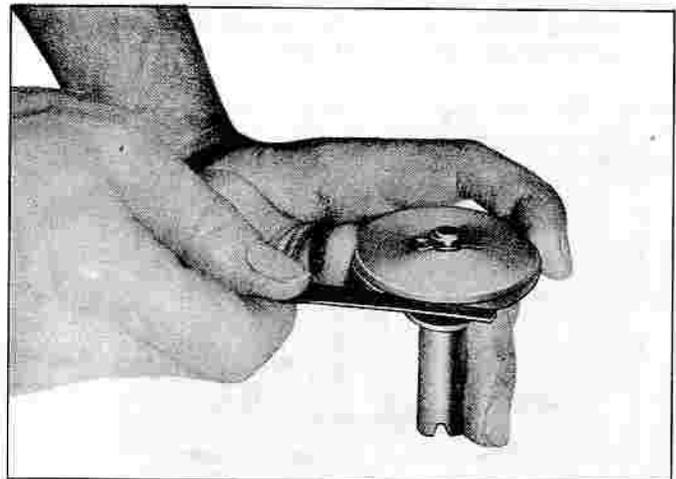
E-13—Measuring Piston-to-Ring Clearance
